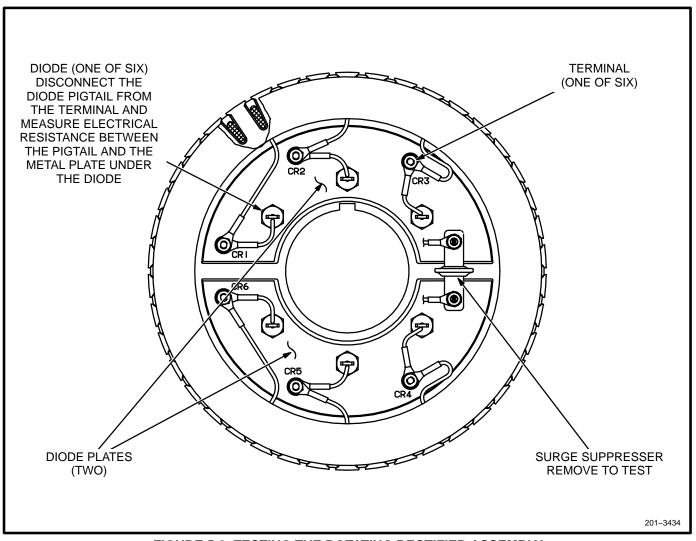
TESTING THE ROTATING RECTIFIER ASSEMBLY
